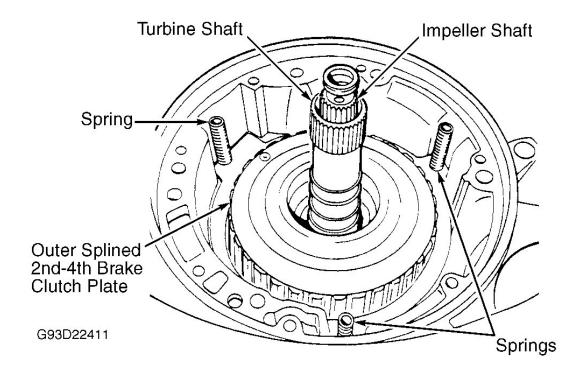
Installing 2nd-4th Brake Clutch Plate & Springs Courtesy of VOLKSWAGEN UNITED STATES, INC.
